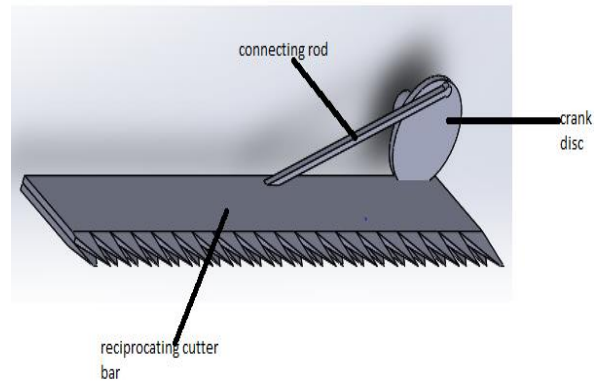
Reciprocating Cutter bar with Slider Crank Mechanism
